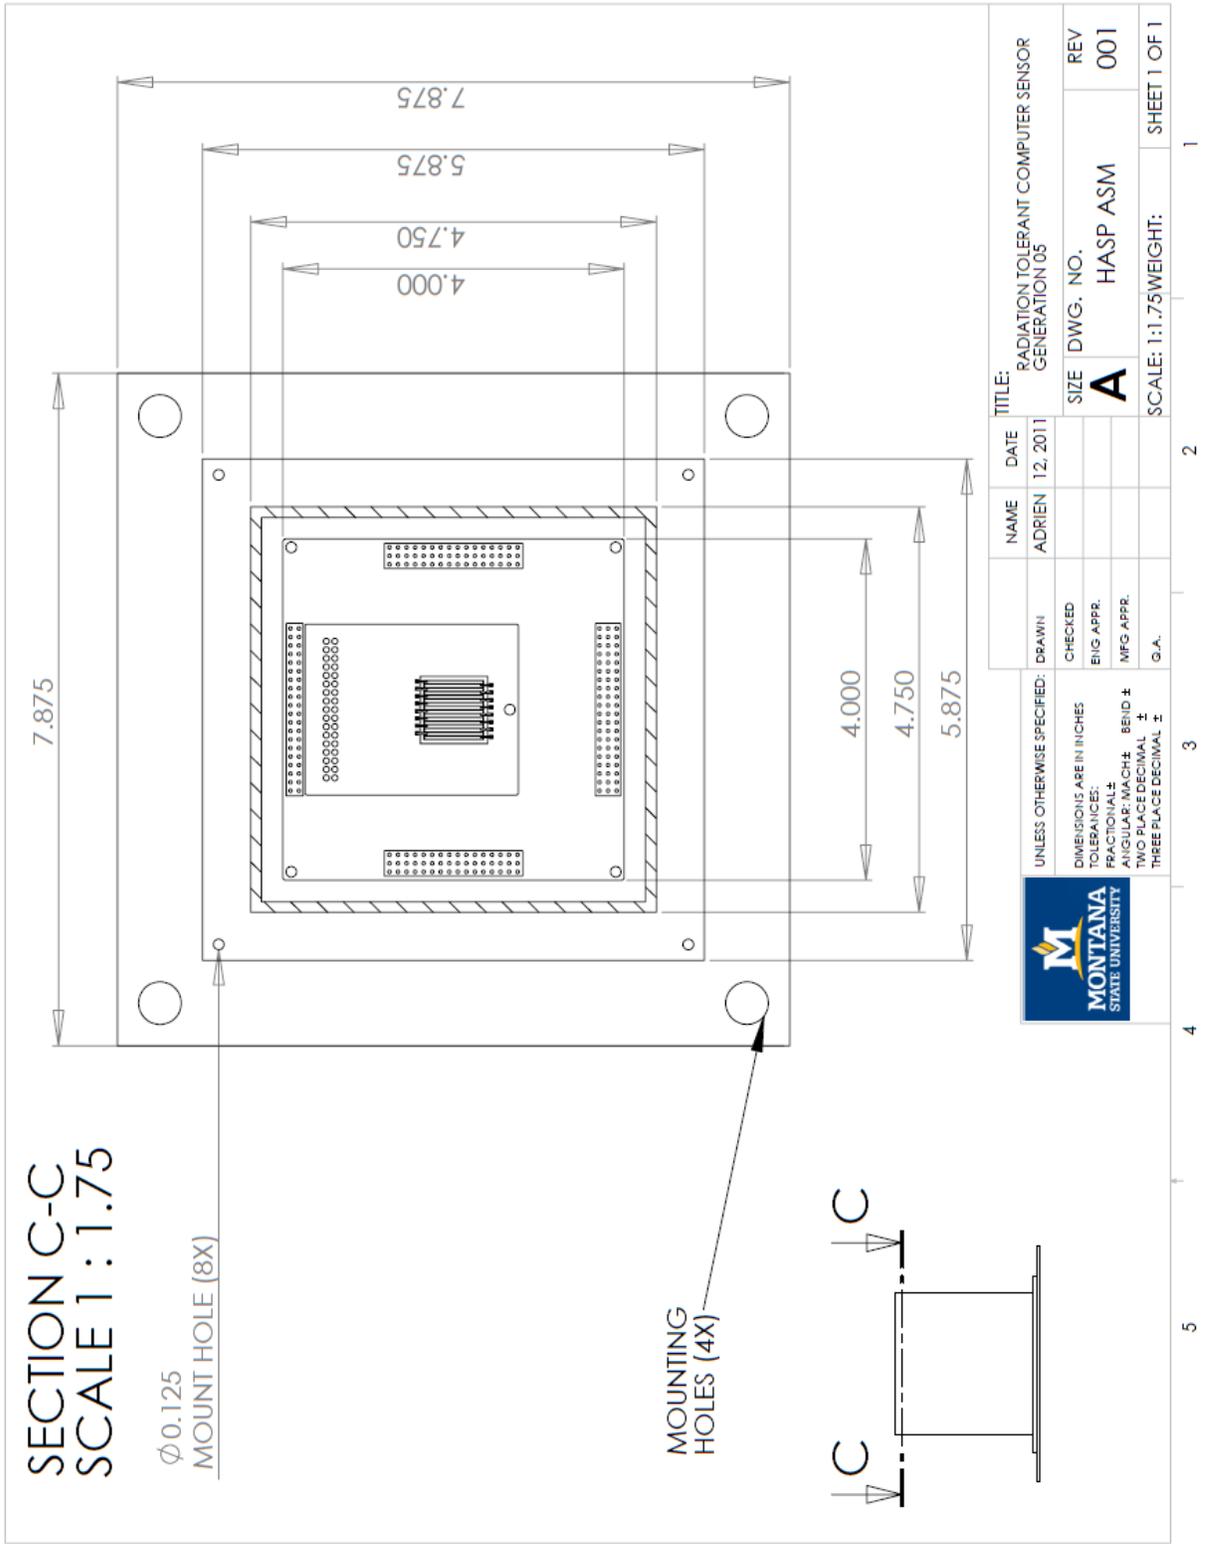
Top view of payload with electronics stack. Dimensions are in inches.
